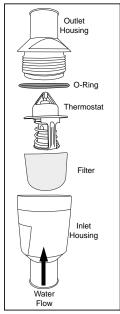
Exhaust Cooling System Thermostat Housing - 6.0L CES
